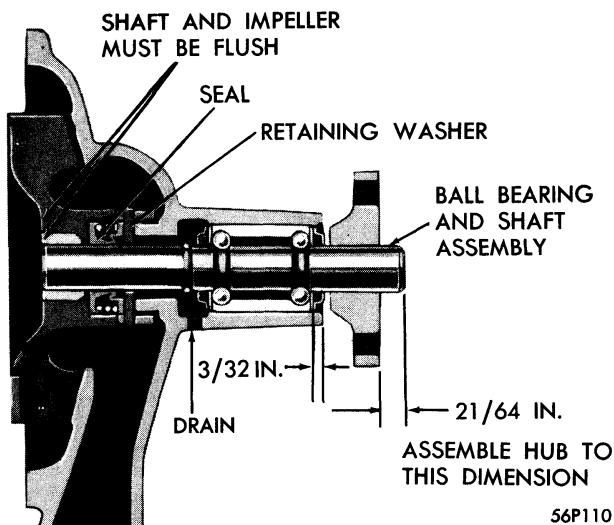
Cross-Sectional View of Water Pump Typical of 277, 301 and 318 Cubic Inch V-8 Engine
